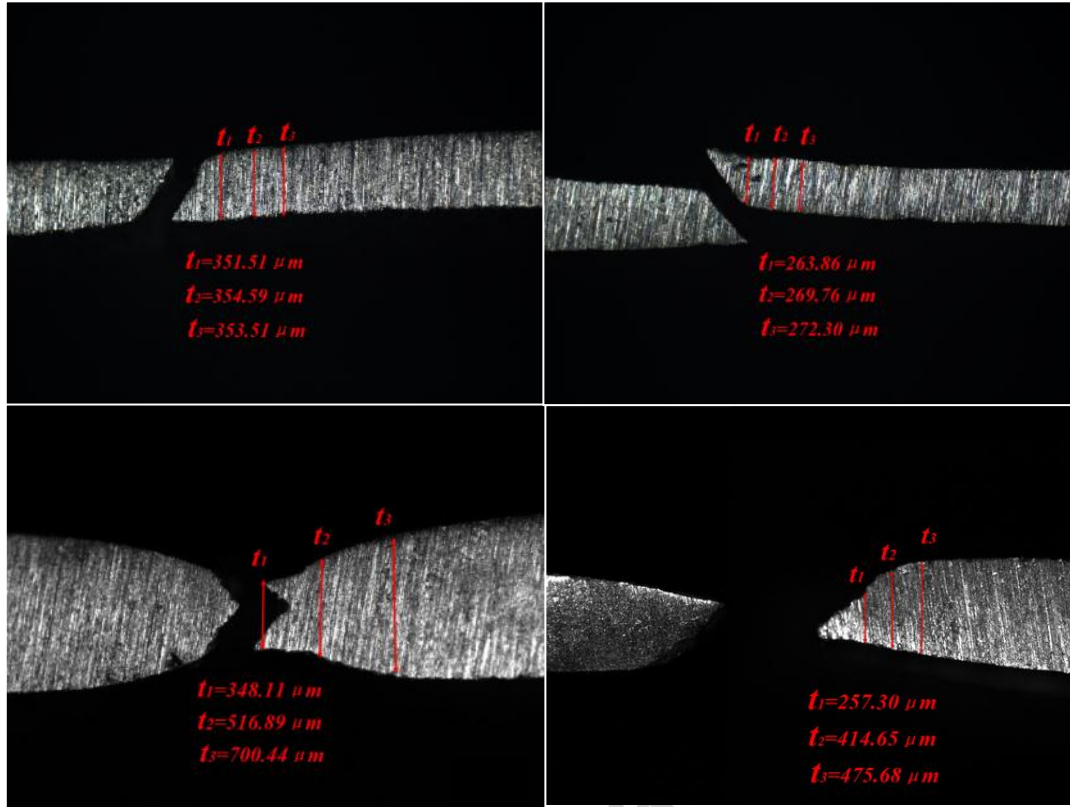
Cross-sectional view of the fracture along meridional direction for AA5052 material: (a) cone part; (b) pyramid part in ISF test; (c) bulge test part under plane-strain condition; (d) bulge test part under equibiaxial stretching condition
